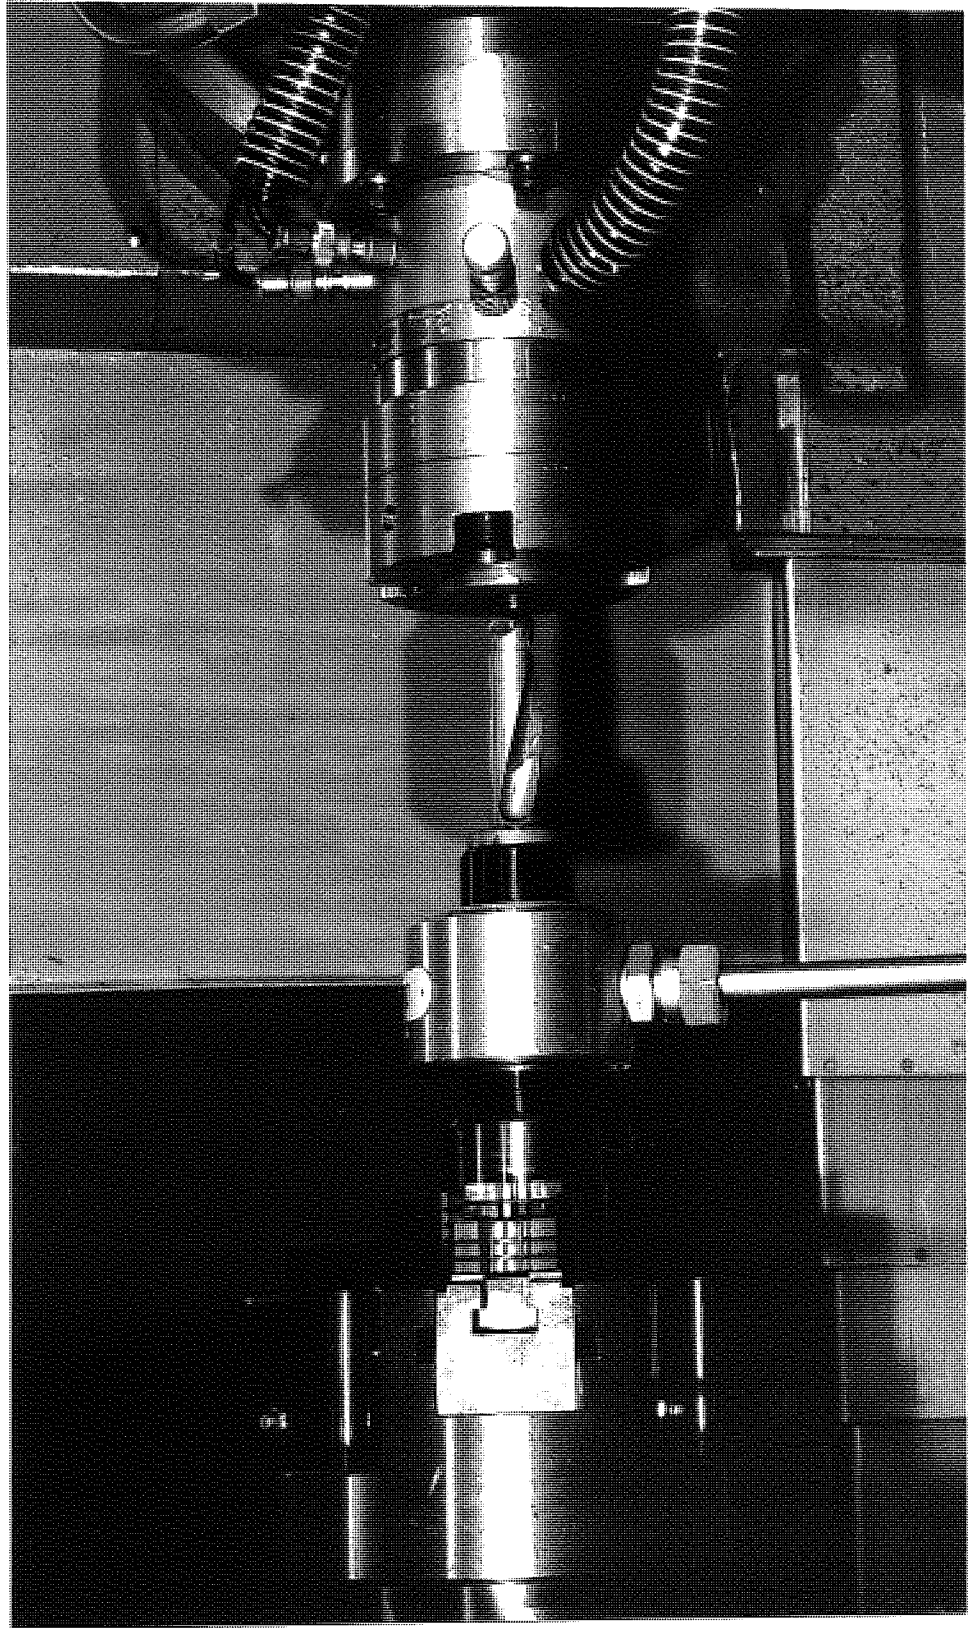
CNC LATHE - SPECIAL TEST SET UP DESIGNED FOR TESTING ROTATING CARBIDE TIPPED DRILLS
